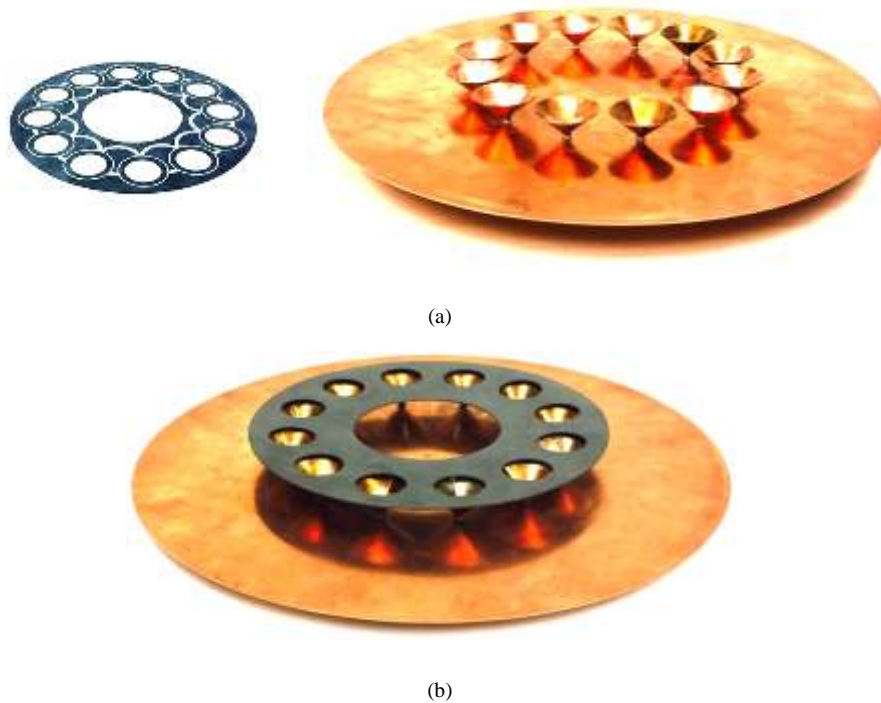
The fabricated 12-element circular mono-conical antenna array out of copper and the tin surface finished feed-forward strips printed on 30 mil RT5880. (a) Disassembled (b) Assembled by means of soldering.
